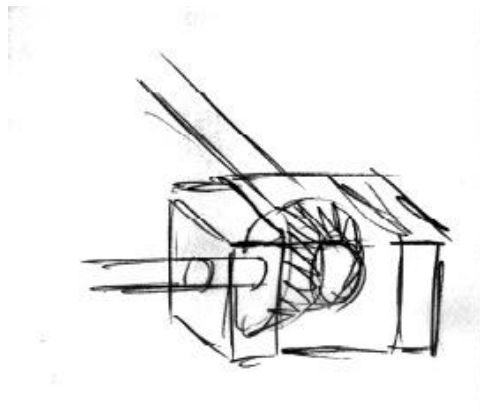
Rough Sketch of the gear mechanism. Two gearboxes are included in this design option. The gearboxes allow the user to see the probe and base placement looking from the front.
